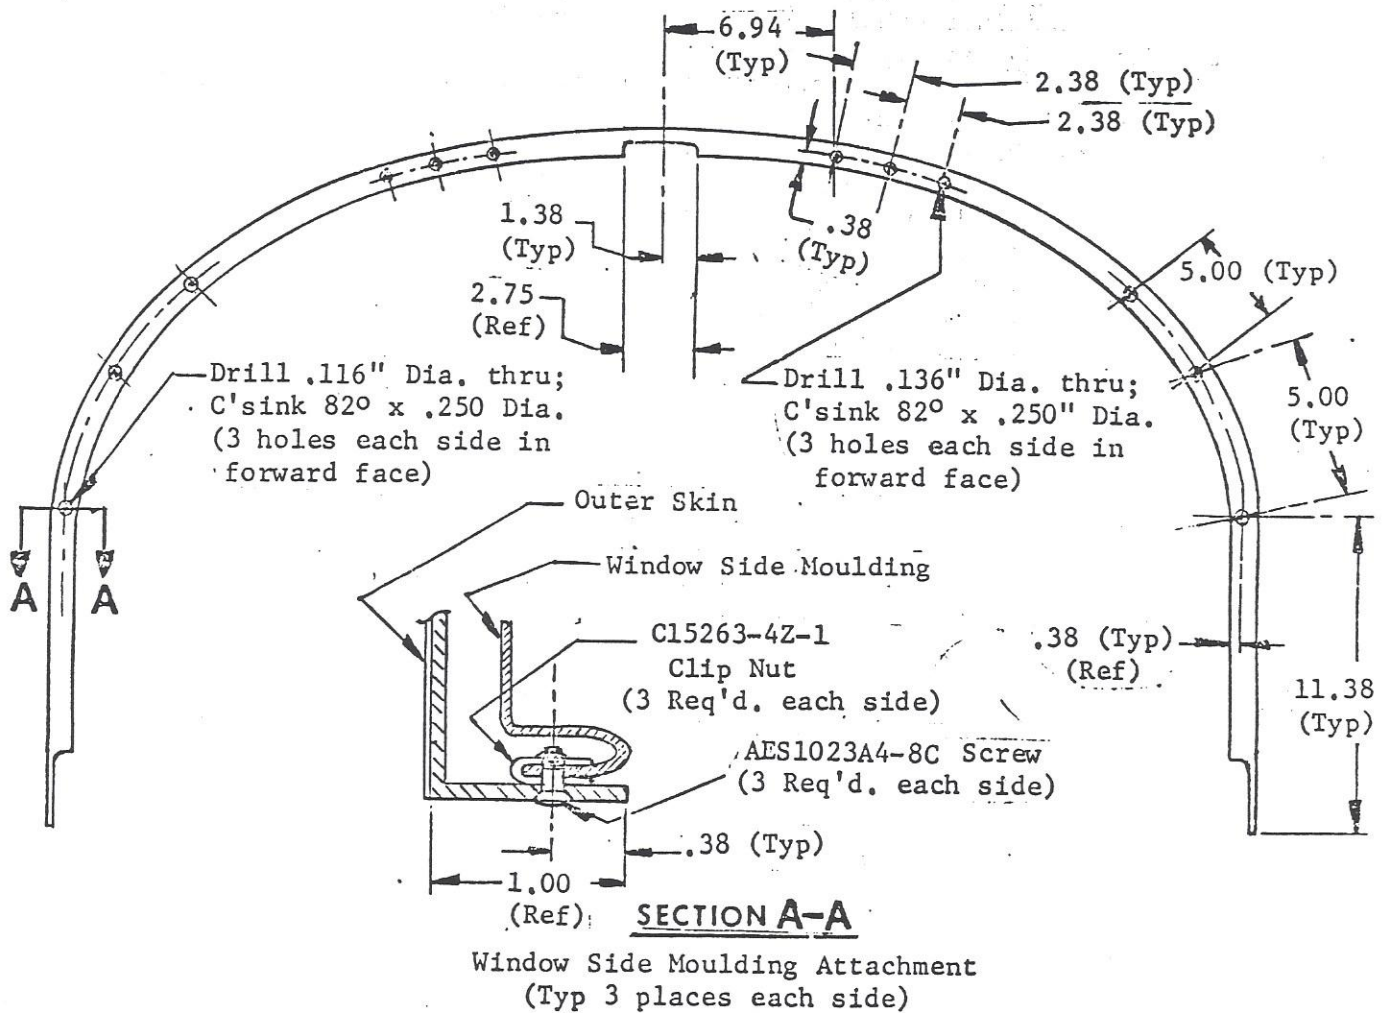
FORWARD CANOPY BOW DRILLING AND COUNTERSINKING INSTRUCTIONS
